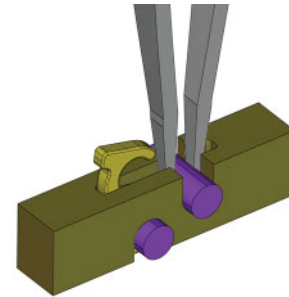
CAREFULLY REMOVE THE EXISTING ELASTOMER.
